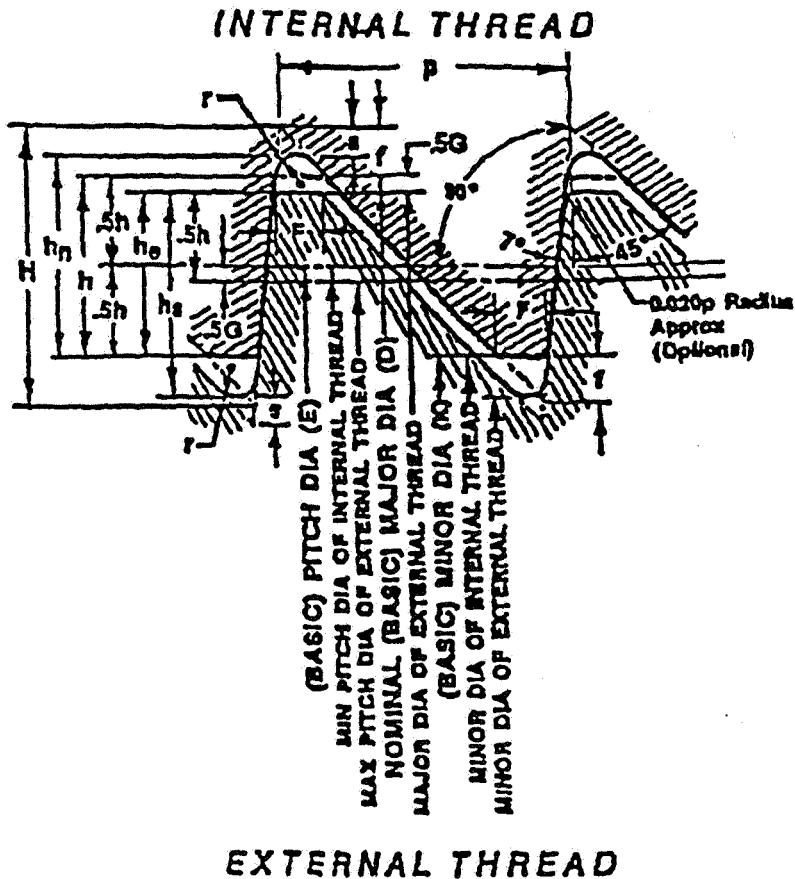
FORM OF STANDARD 7°/45° BUTTRESS THREAD WITH 0.60 BASIC HEIGHT OF THREAD ENGAGEMENT AND ROUND ROOT
